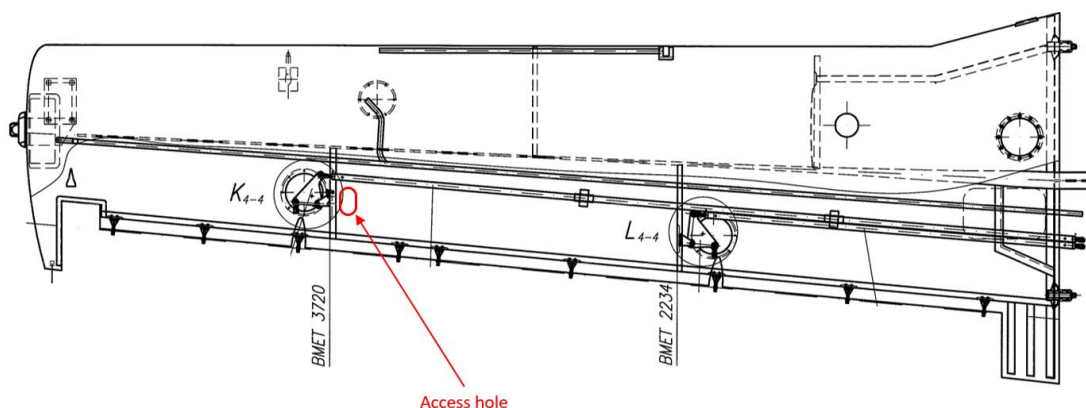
Access Hole Wing, Aileron bell crank attachment bolts (LH shown, RH mirrored)
